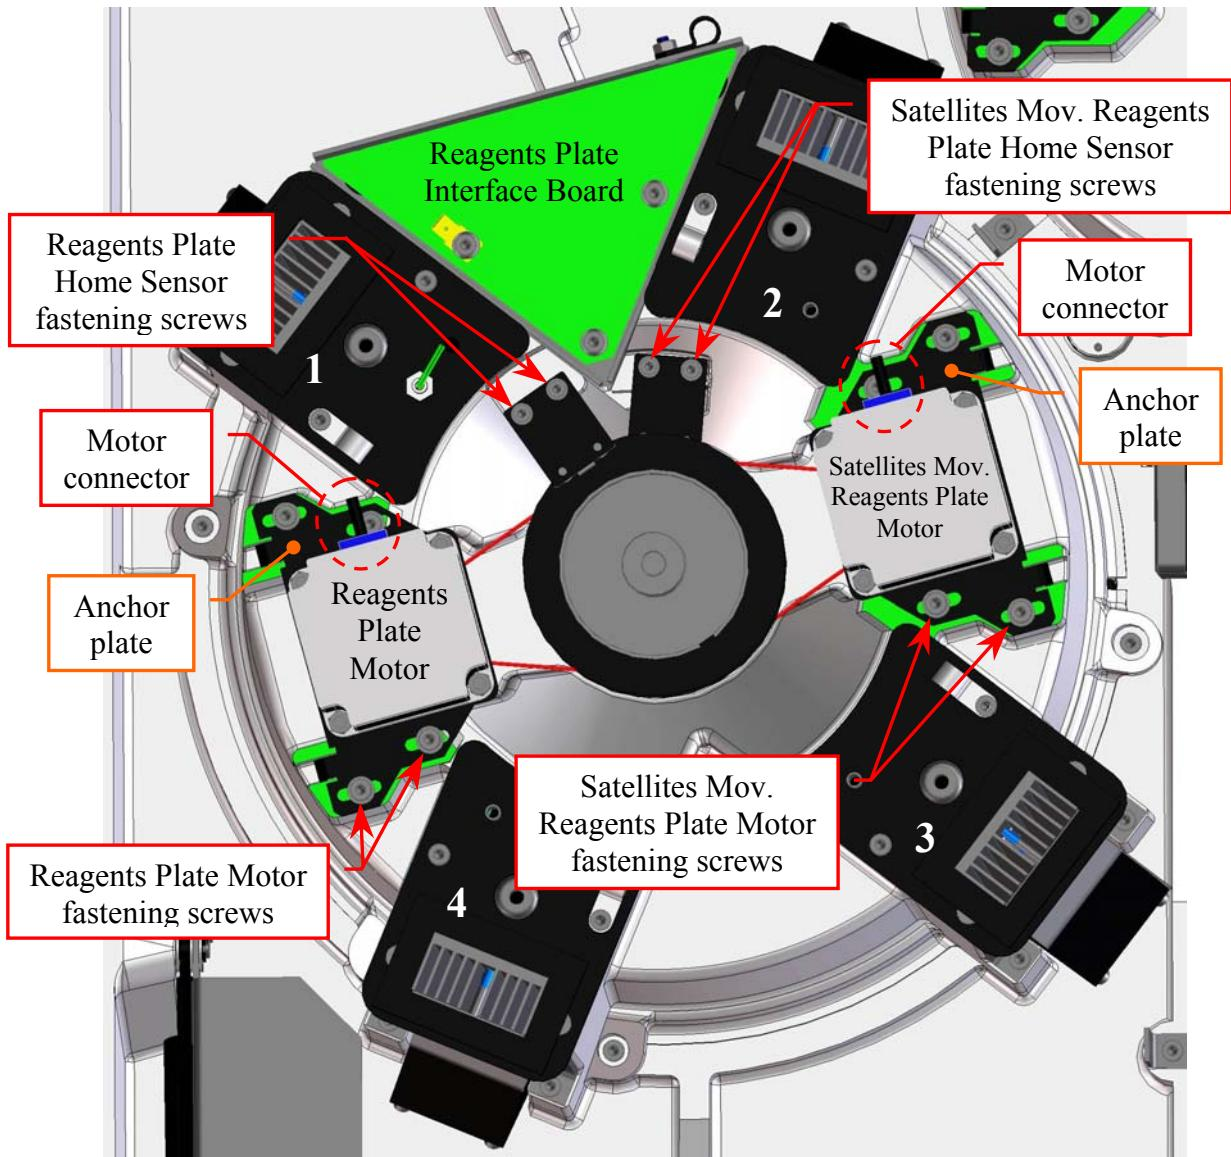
Reagents Plate Motor and Satellites Mov. Reagents Plate Motor
